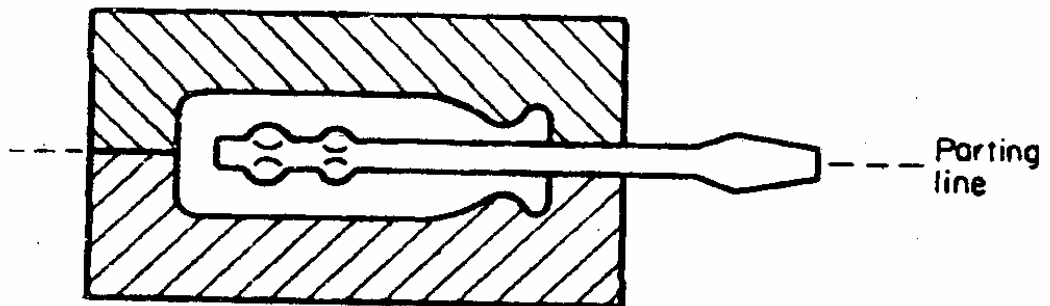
Irregularly shaped inserts are placed on the parting line of the mold.
